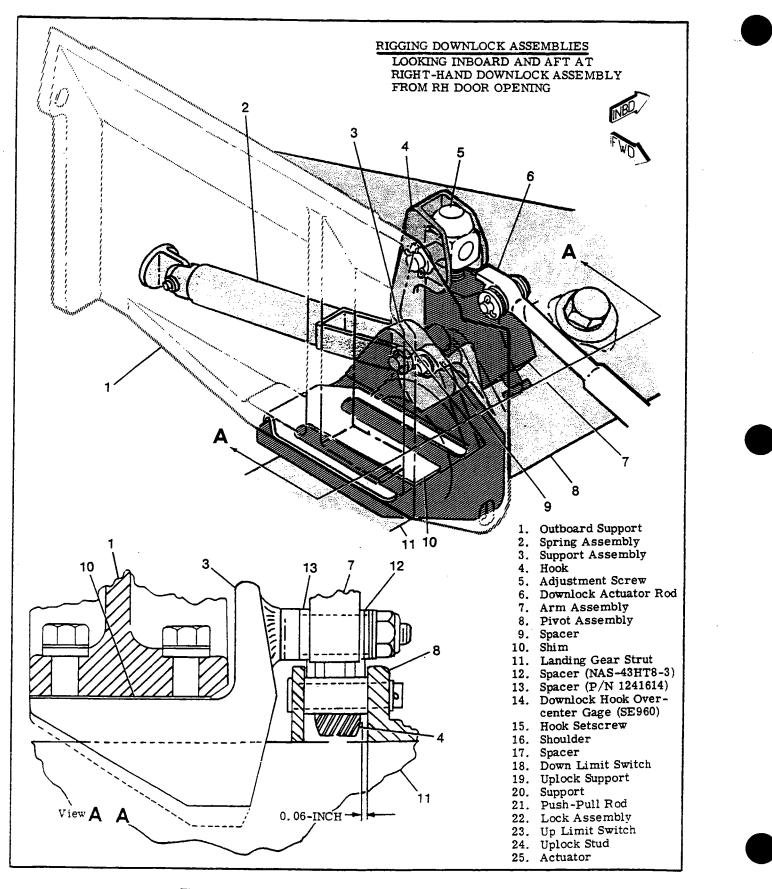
Rigging Main Landing Gear (Sheet 1 of 4)
